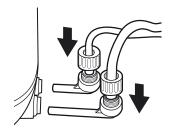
Installing Inlet and Outlet Tubes to Tube Connectors
